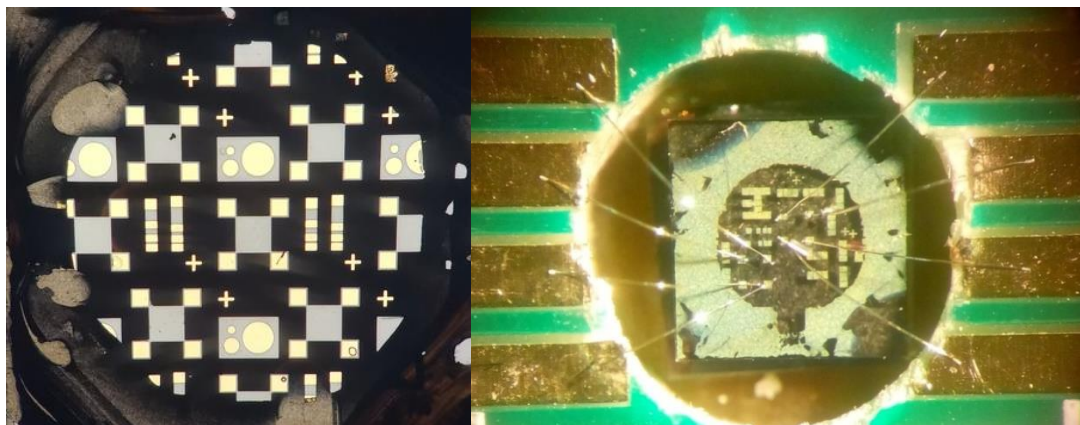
Photograph of a diamond sample from the side of the CVD layer with deposited contacts. (left) – test structures on the diamond, (right) – the test sample welded onto the PCB board.
